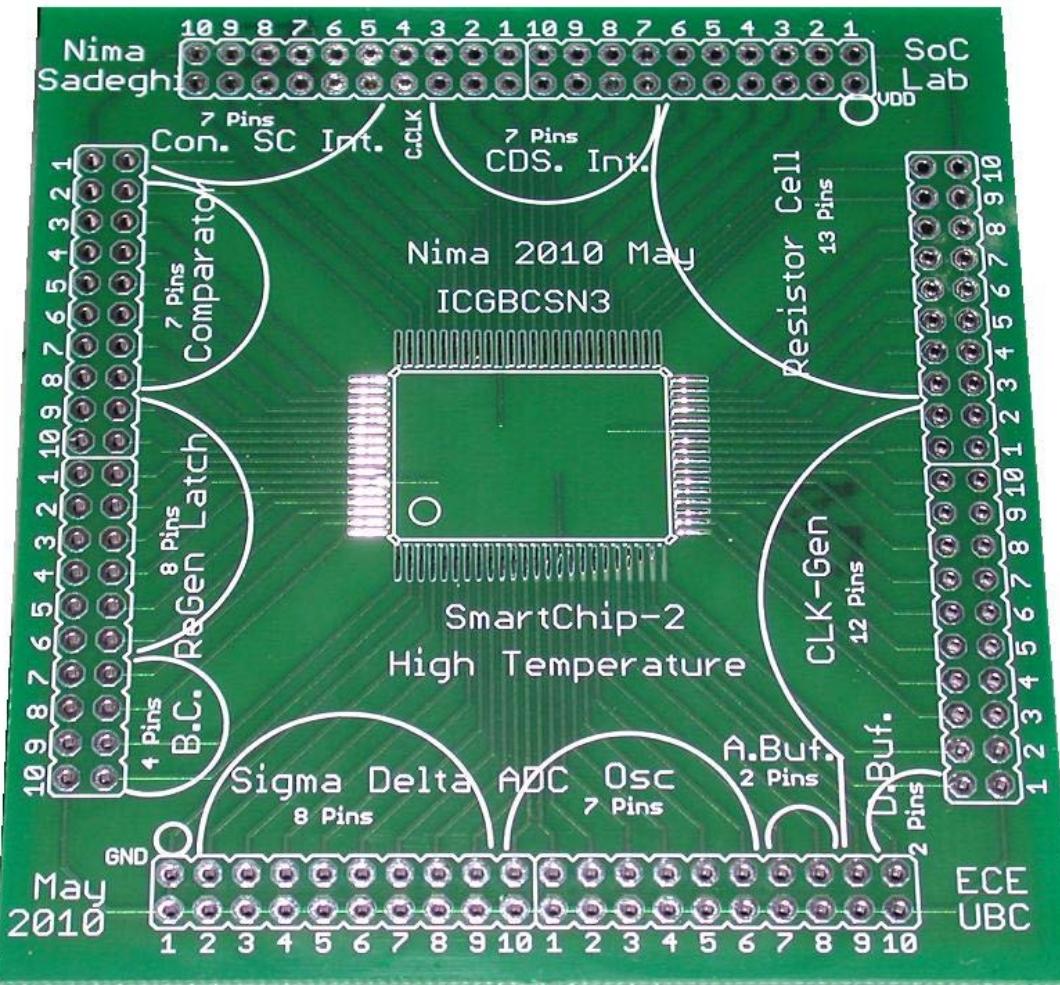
Solder coat. Solder (tin/lead) is applied to the exposed copper areas, and the excess solder is removed.
